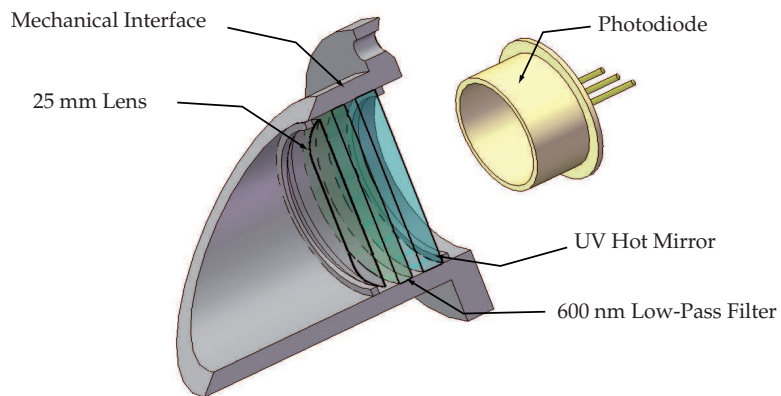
Mechanical interface of Process Monitor sensor for the integrated laser welding head.
